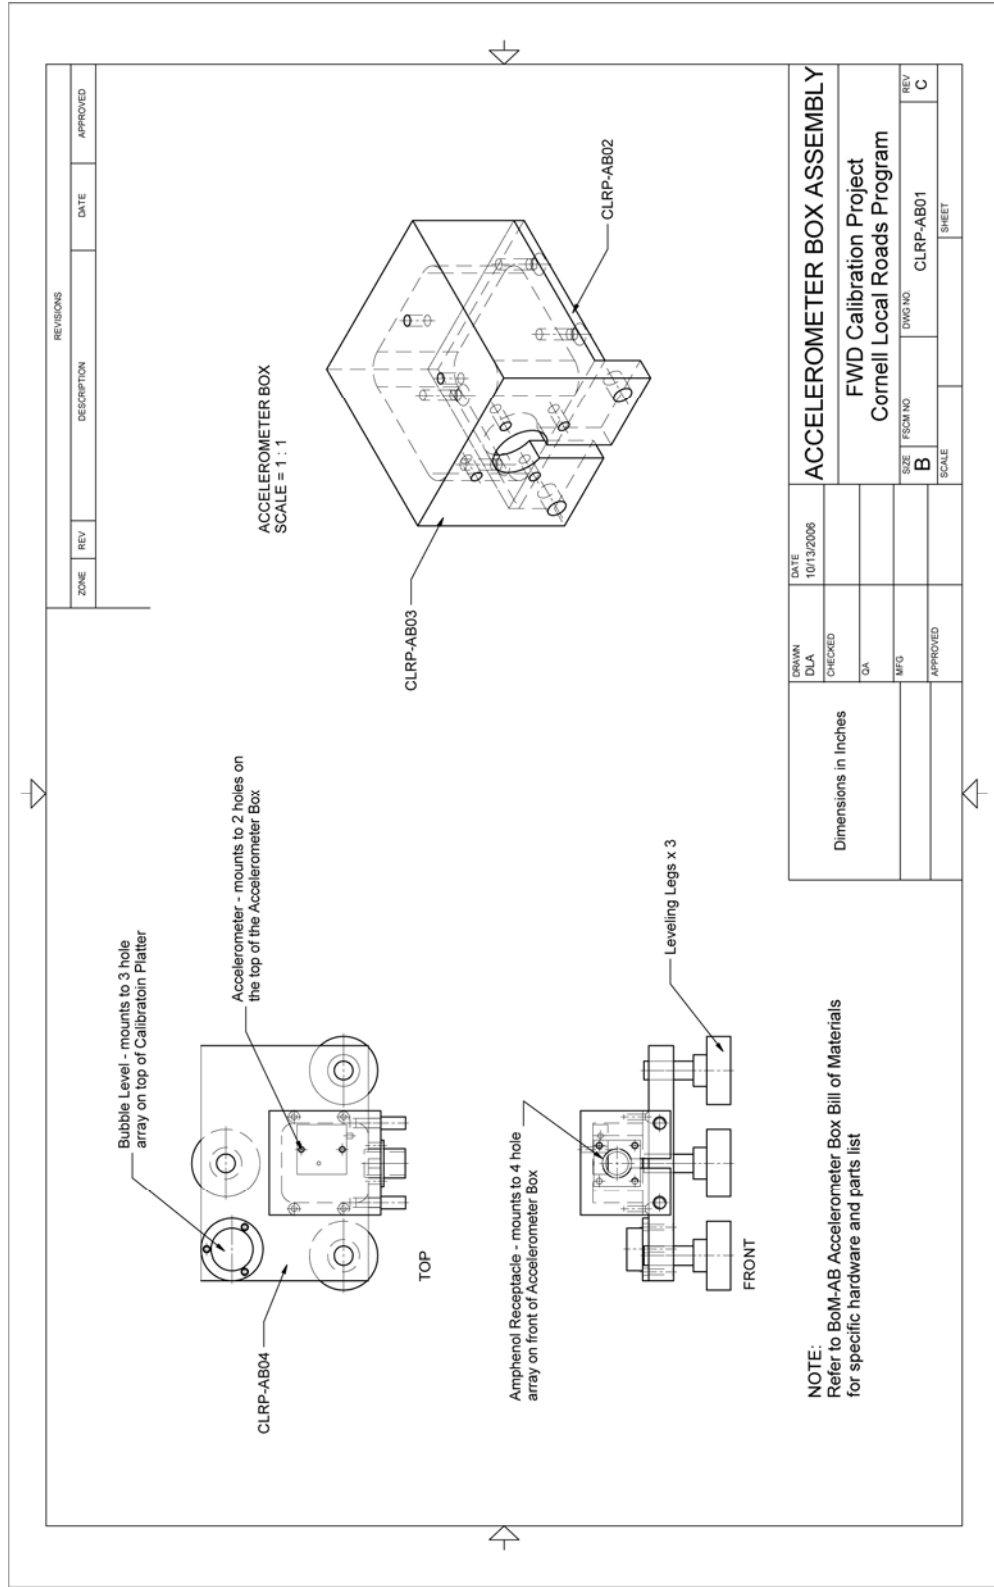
Drawing. CLRP-AB01 Accelerometer Box Assembly.
